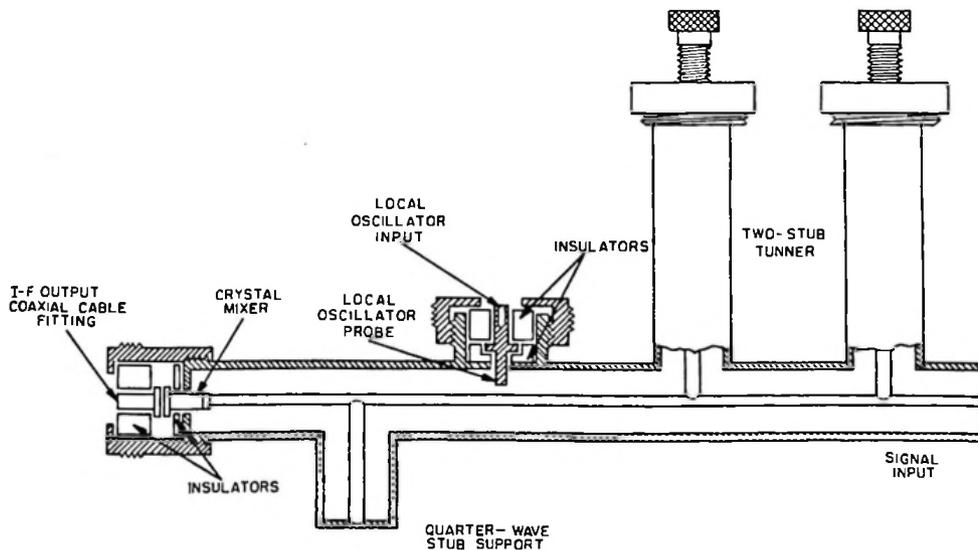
Coaxial Line Receiver Coupling Assembly
